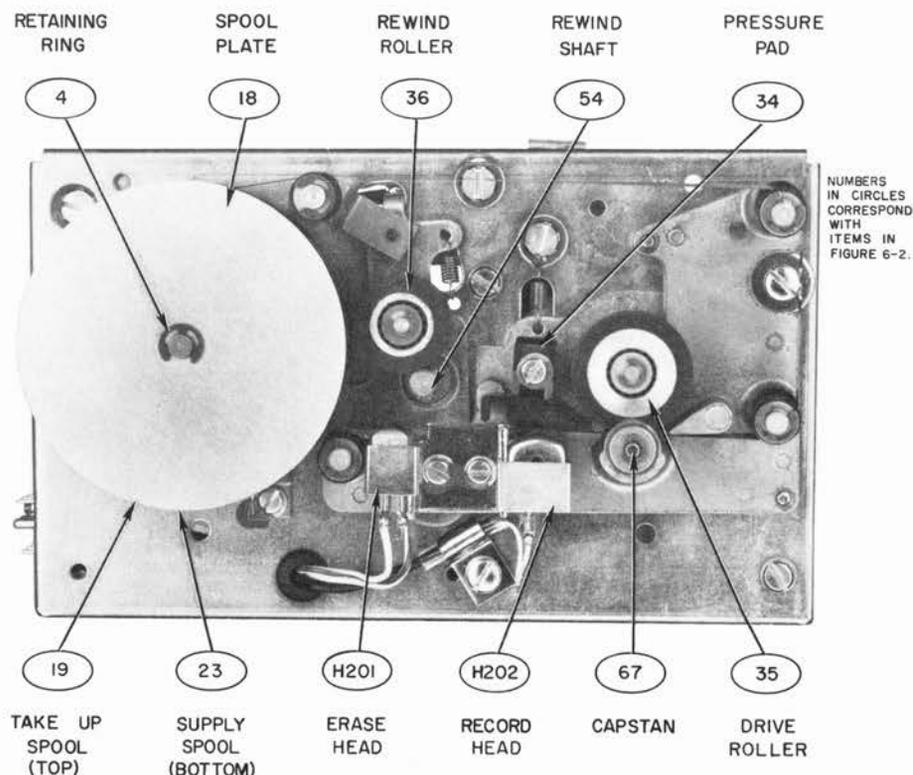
TAPE DECK FRONT VIEW, COVER REMOVED
